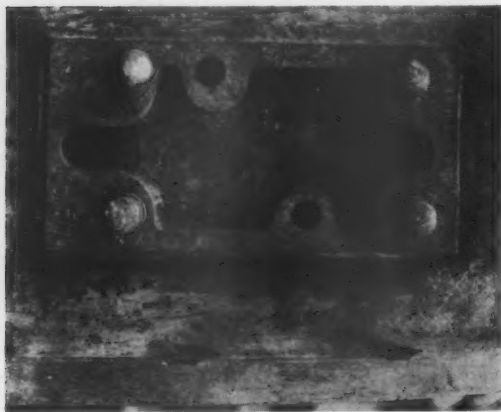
LARGE BOLTING PAD AVOIDING SHARP CORNERS BY CORING OUT THE PAD.
